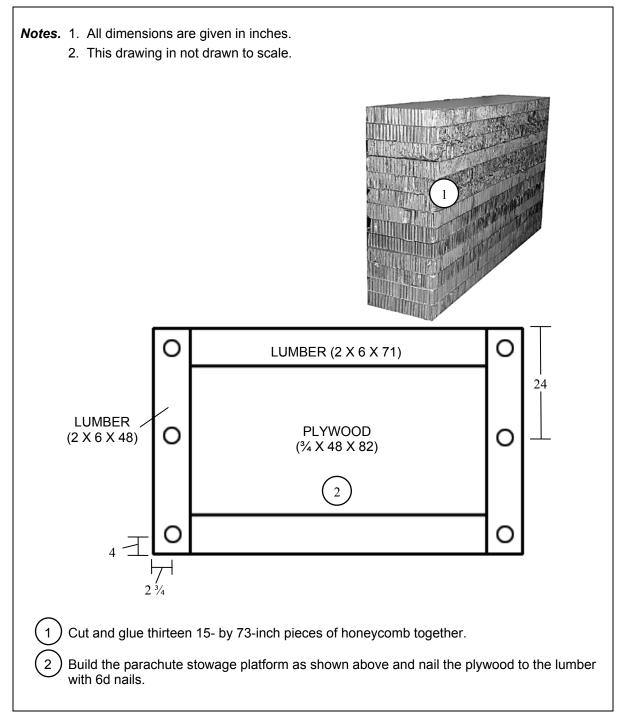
Parachute Support Stack and Stowage Platform Built
